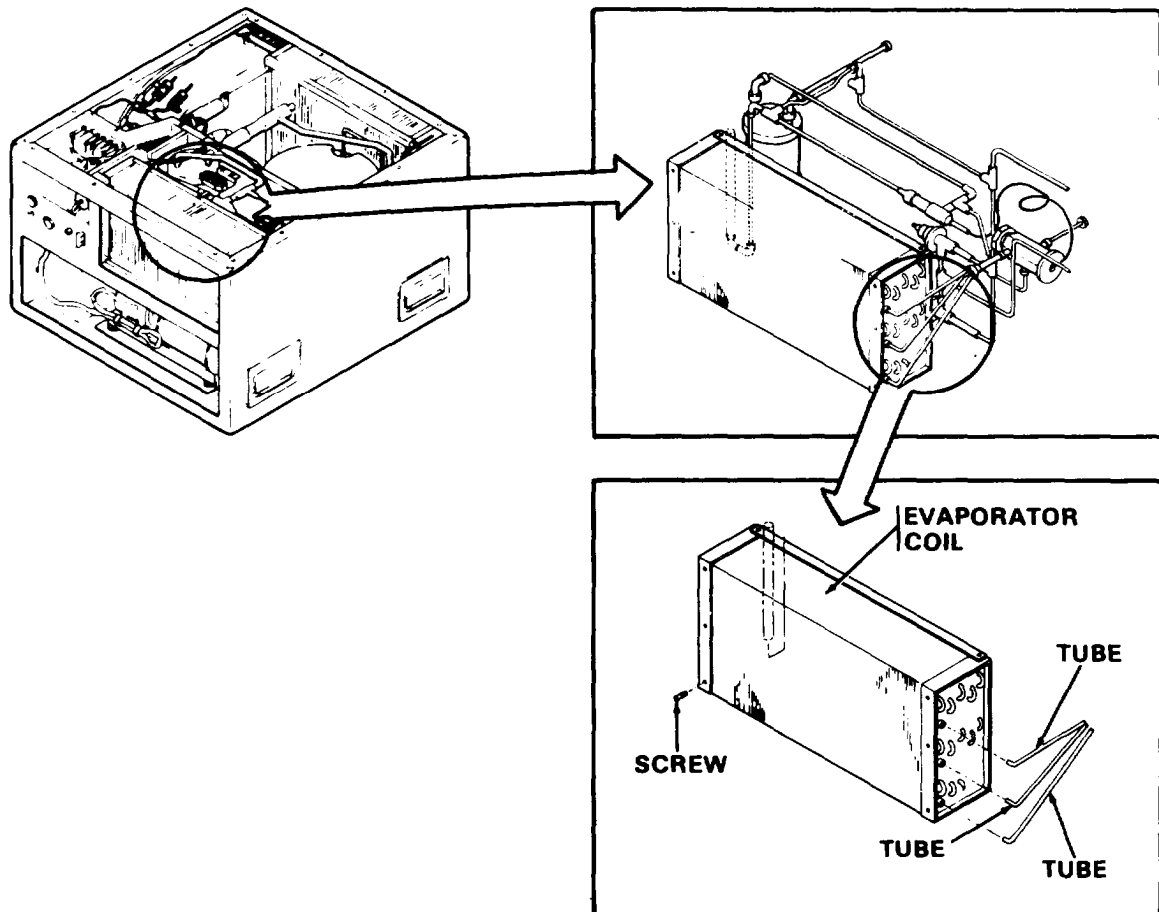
Evaporator Coil and Mist Eliminator Holder
